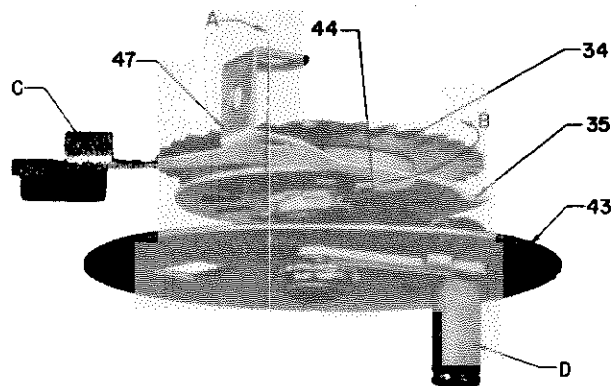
Clutch Assembly with Pawl (44) Disengaged
